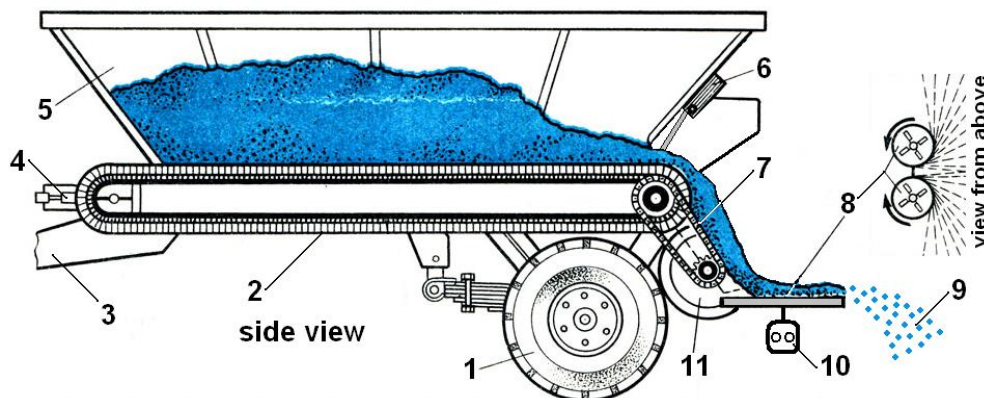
Scheme of centrifugal spreader: 1 – supporting wheel; 2 - wire-belt conveyor; 3 - drawbar frame;
